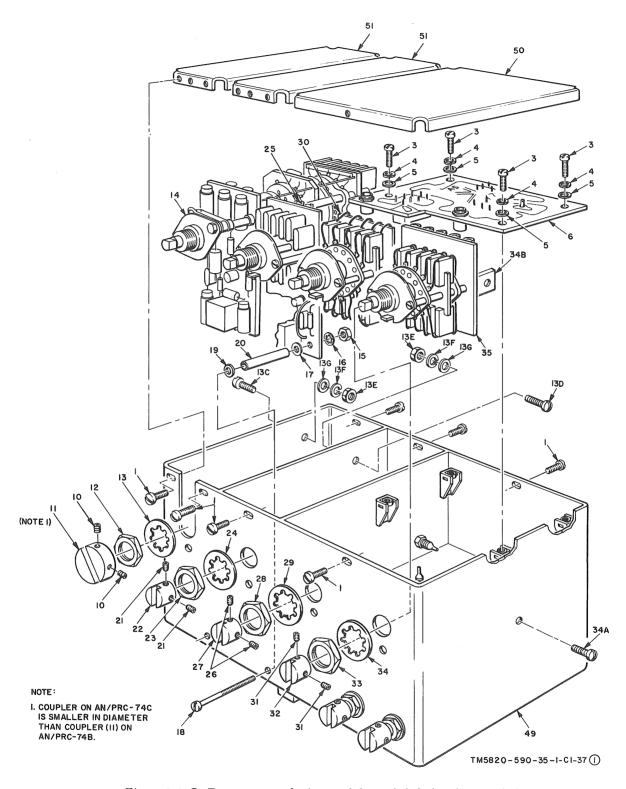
Frequency synthesizer module, exploded view (part 1 of 2).
